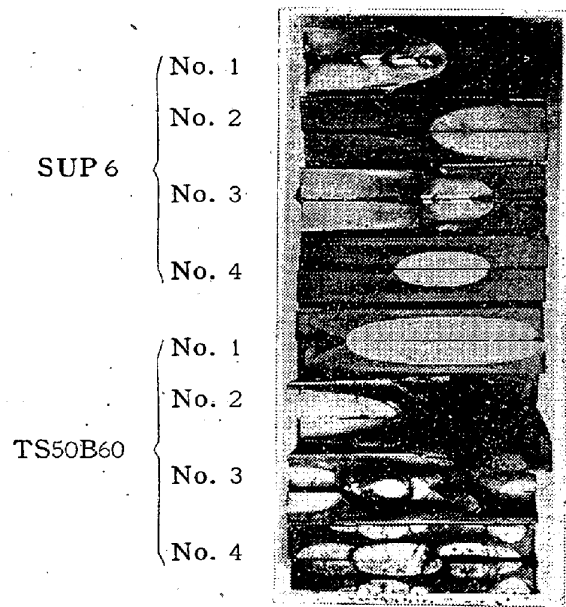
Fractures of test pieces broken by the resonance-type-fatigue machine.
